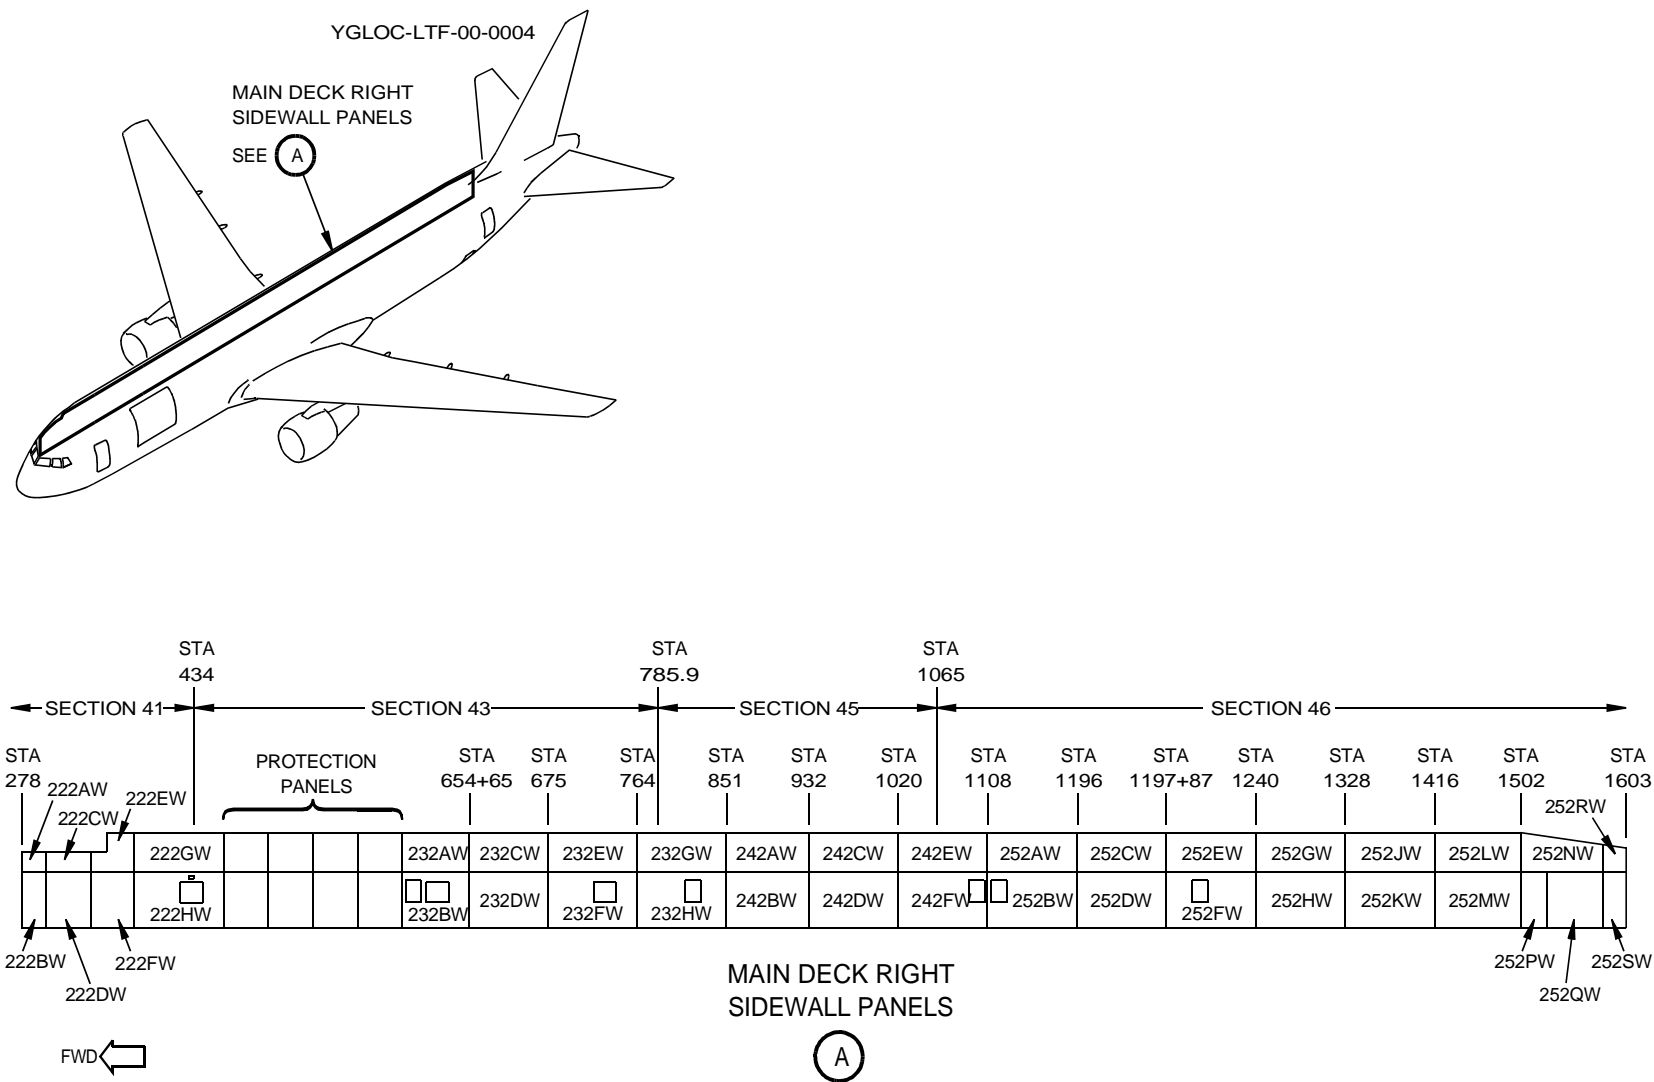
767-300BCF RIGHT SIDEWALL ACCESS PANELS (MAIN DECK CARGO AREA)
